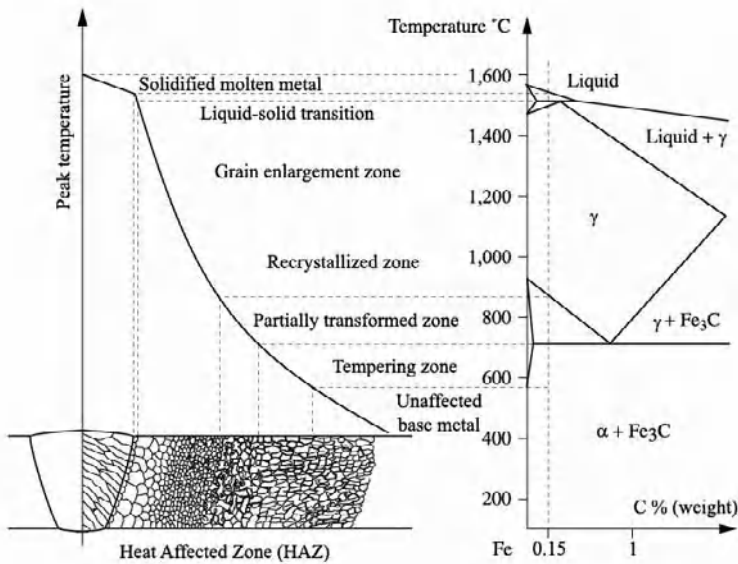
Presentation of the various constituent parts of a welded joint; from [EAS 83]
